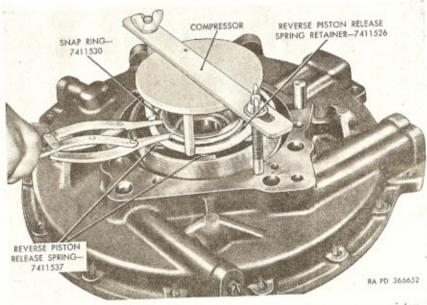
Use of compressor—C7950251 to compress reserve piston release springs.
